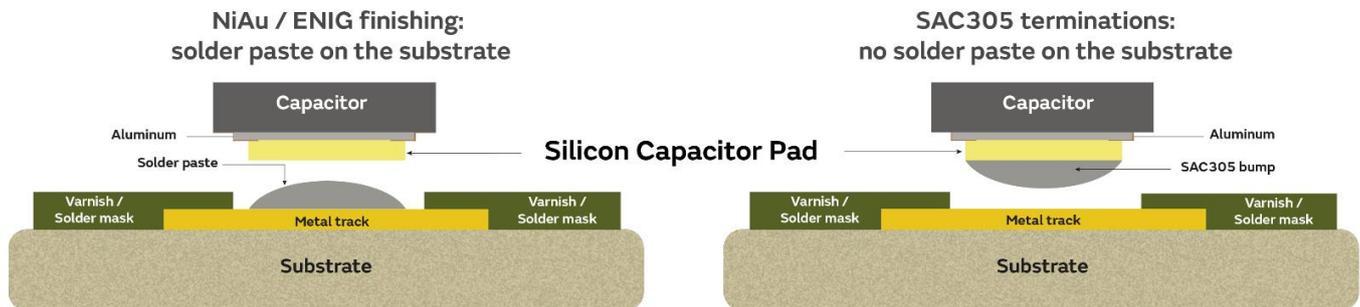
Simplified view of SMD assembly from the side (only one pad is shown here)
